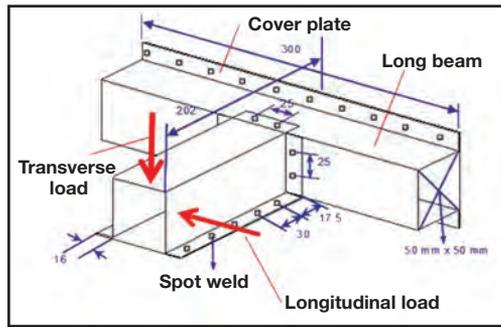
A component sample used to validate spot weld failure parameters.
